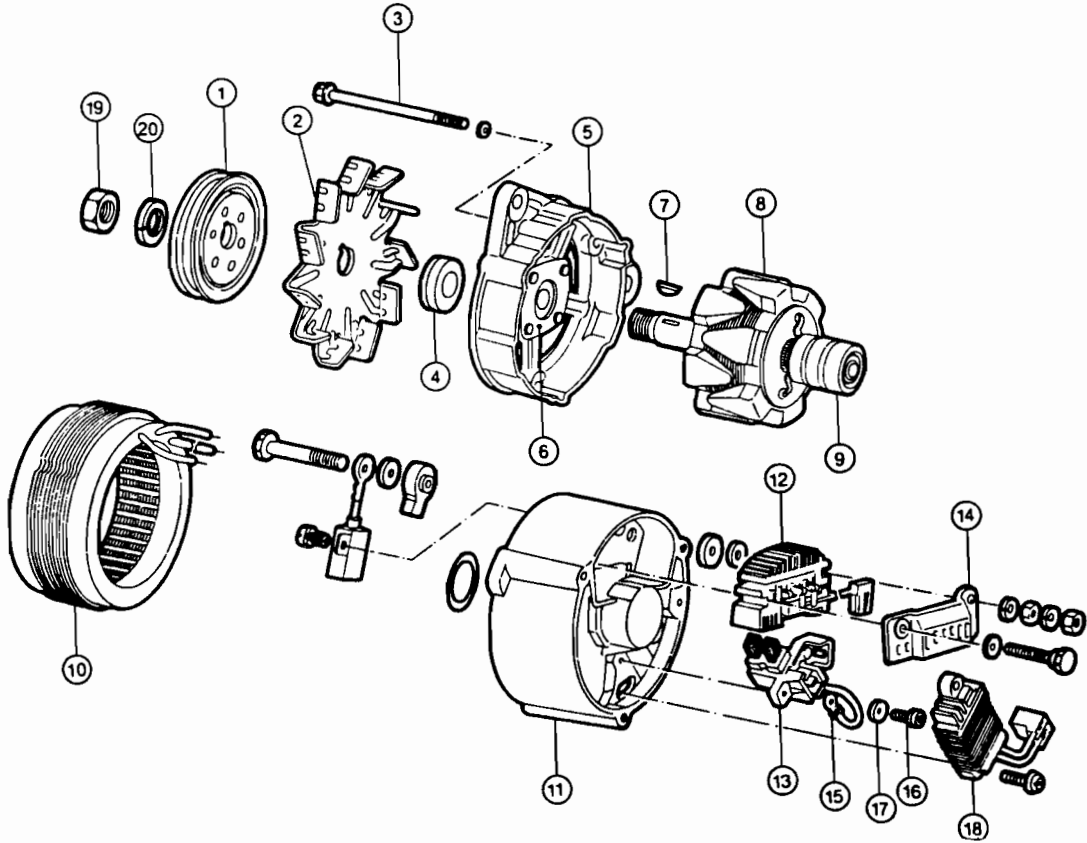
Exploded view of the Marelli alternator (Sec 9)
